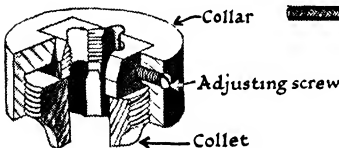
A die of 'Little Giant' type shown in section, Type 3
